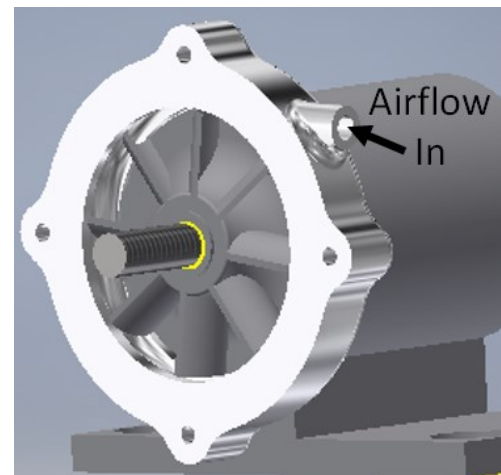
Schematic of the testing rig used to evaluate the turbine assembly.
